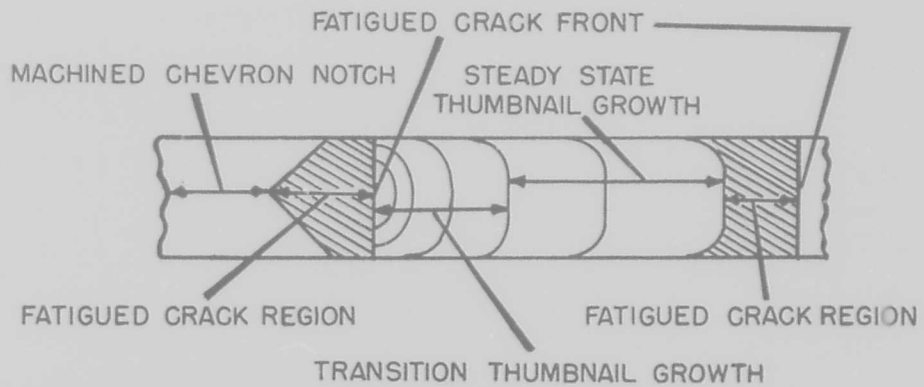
TYPICAL FRACTURE SURFACE IN ALUMINUM 7075-T651 SPECIMEN
